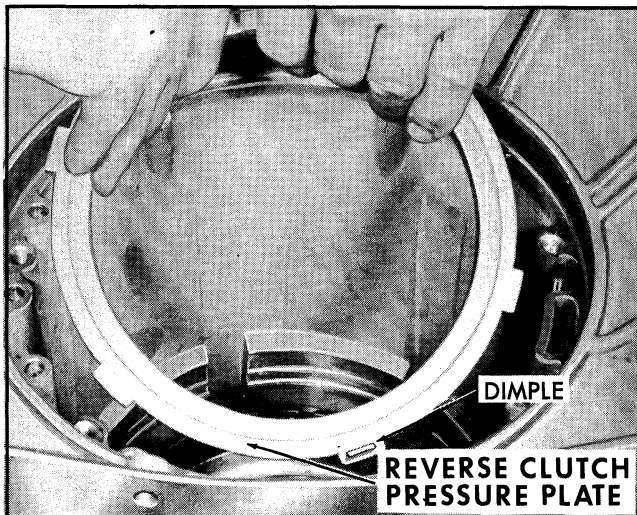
B-123 Installing Reverse Clutch Pressure Plate
